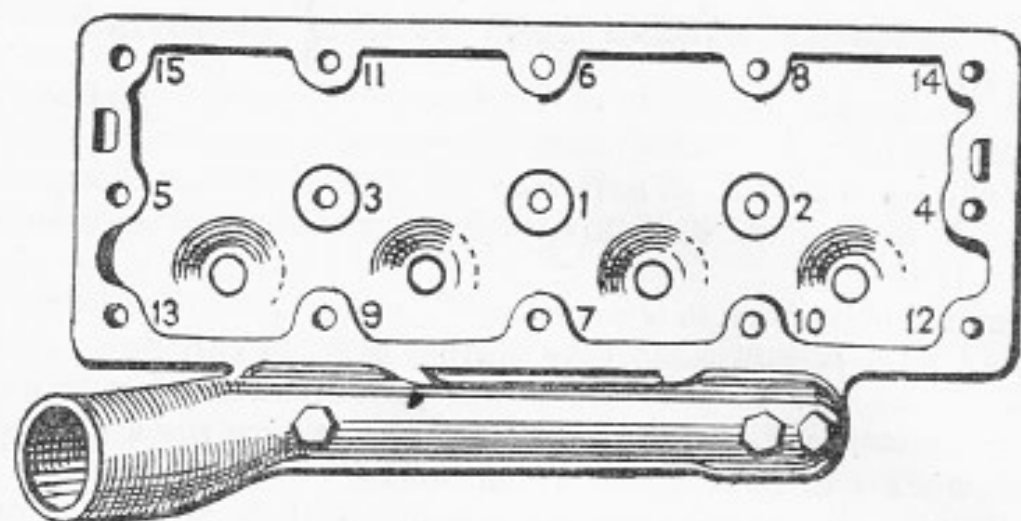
ORDER OF REMOVING CYLINDER HEAD NUTS—
